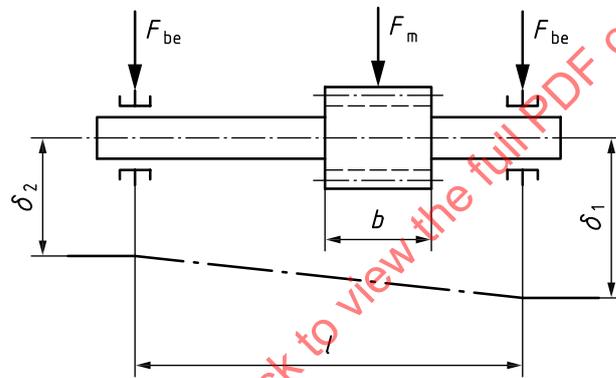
Loading and deflections for gear mounted between the bearings [see [Formula \(69\)](#)]
